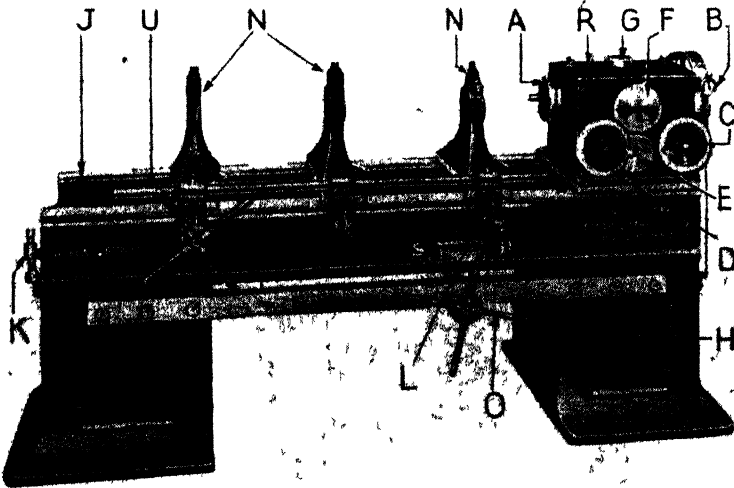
THE OLSEN-CARWEN TYPE C BALANCING MACHINE
